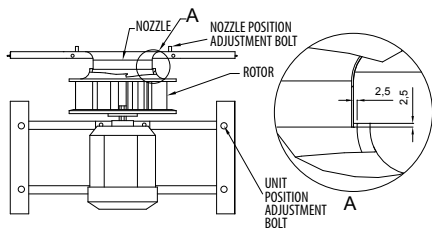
Adjustment of the slot between the rotor and outlet nozzle.
